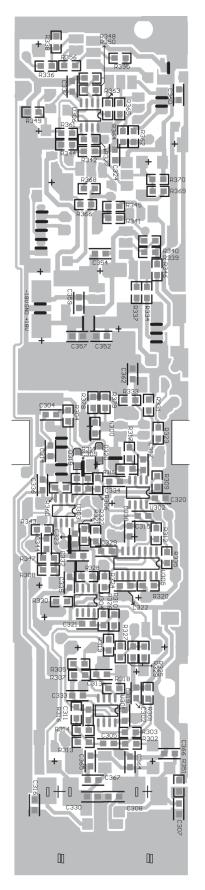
Input/Limiter PCB (RoHS) Top Side Etch Layout
